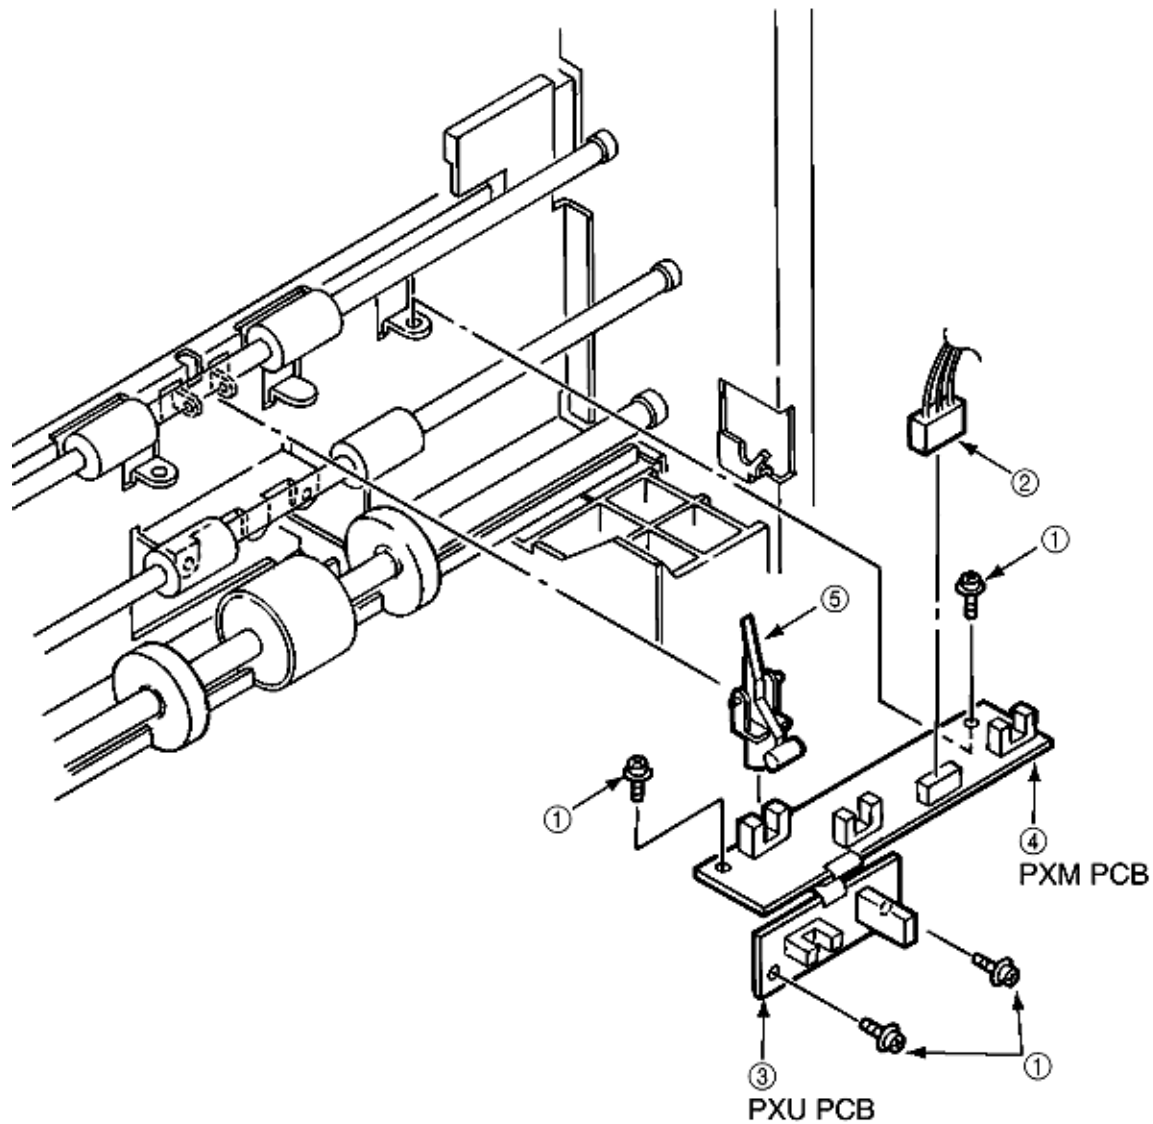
PXU PCB/PXM PCB, Lever Resist Sensor
